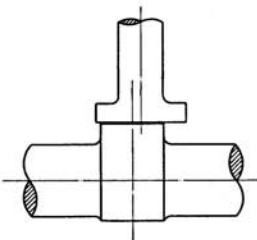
Center of camshaft lobe and center of valve lifter are offset to prevent eccentric wear of contact surfaces.
